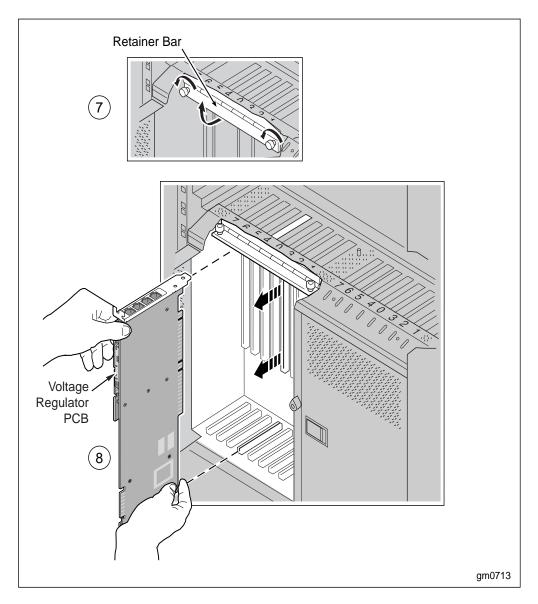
Removing a U916 PCI Card: Steps 7 and 8
